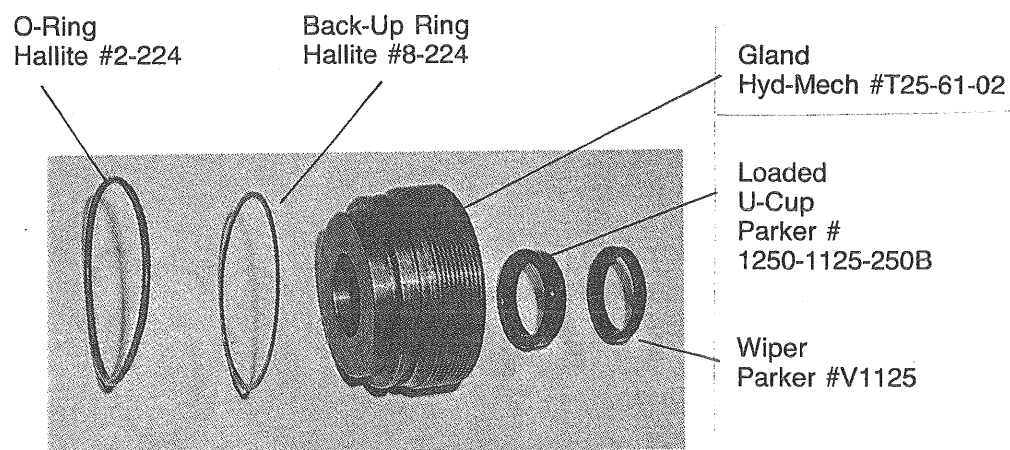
Gland and seals for 2" diameter bore cylinder.
